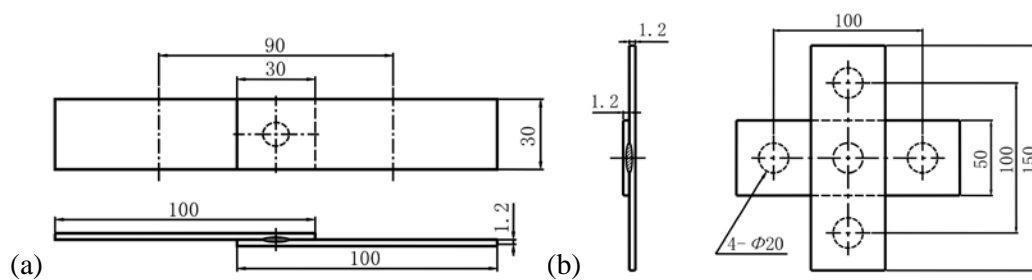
Spot-weld specimen geometries (dimensions in mm). (a) Shear tensile test samples. (b) Cross tensile test samples
